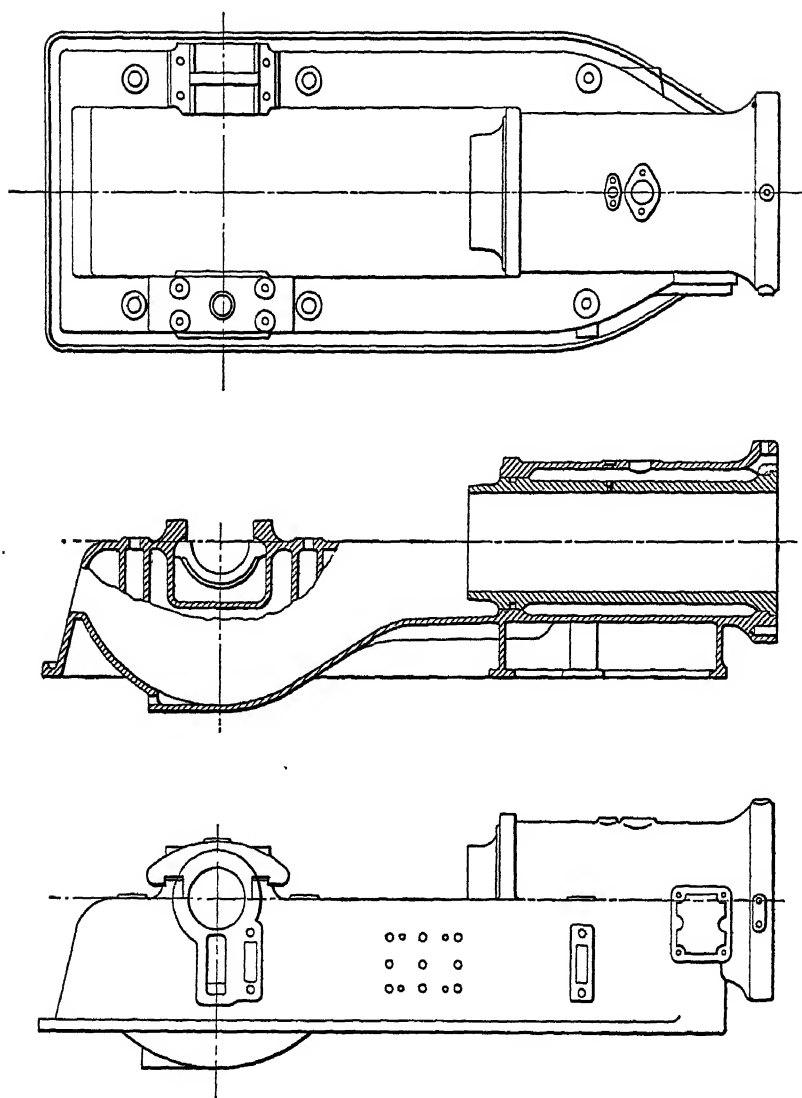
Engine-Bed for Centre-Crank Shaft.
